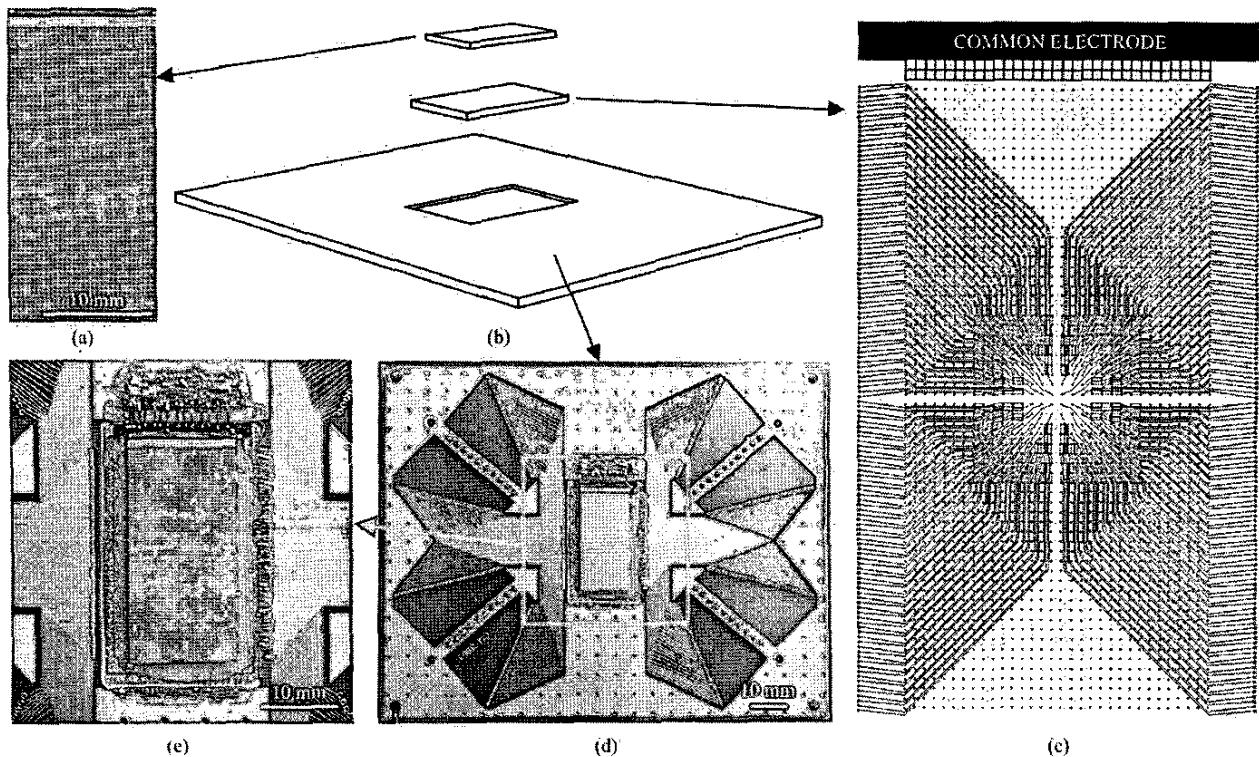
2-D array assembly. (a) 32×64 2-D CMUT array diced from a 128×128 -element array. (b) Schematic representation of 3-D multichip assembly. (c) Top view of the glass carrier chip layout to fan out a 16×16 portion of the 2-D CMUT array. (d) The printed circuit board (PCB) carrying the flip-chip-bonded 2-D array-glass substrate assembly. (e) Magnified view of the center portion of the PCB showing the wire bonds from glass substrate to the PCB.
